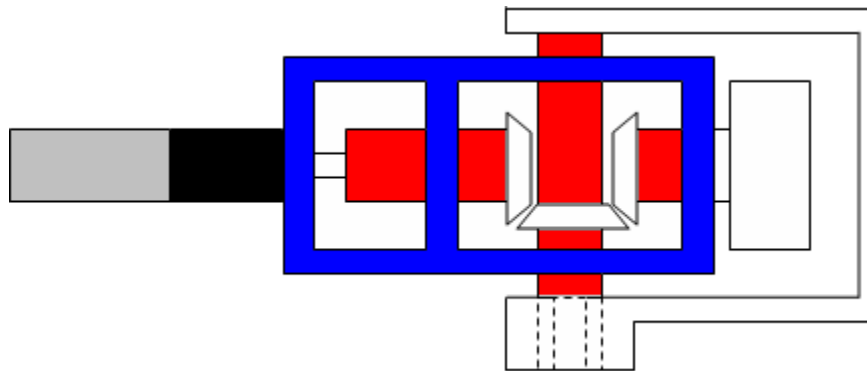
Redesign of the knee joint incorporates a keyway to prevent the sun gear from slipping and a lower structure (blue) made from a single piece of material
